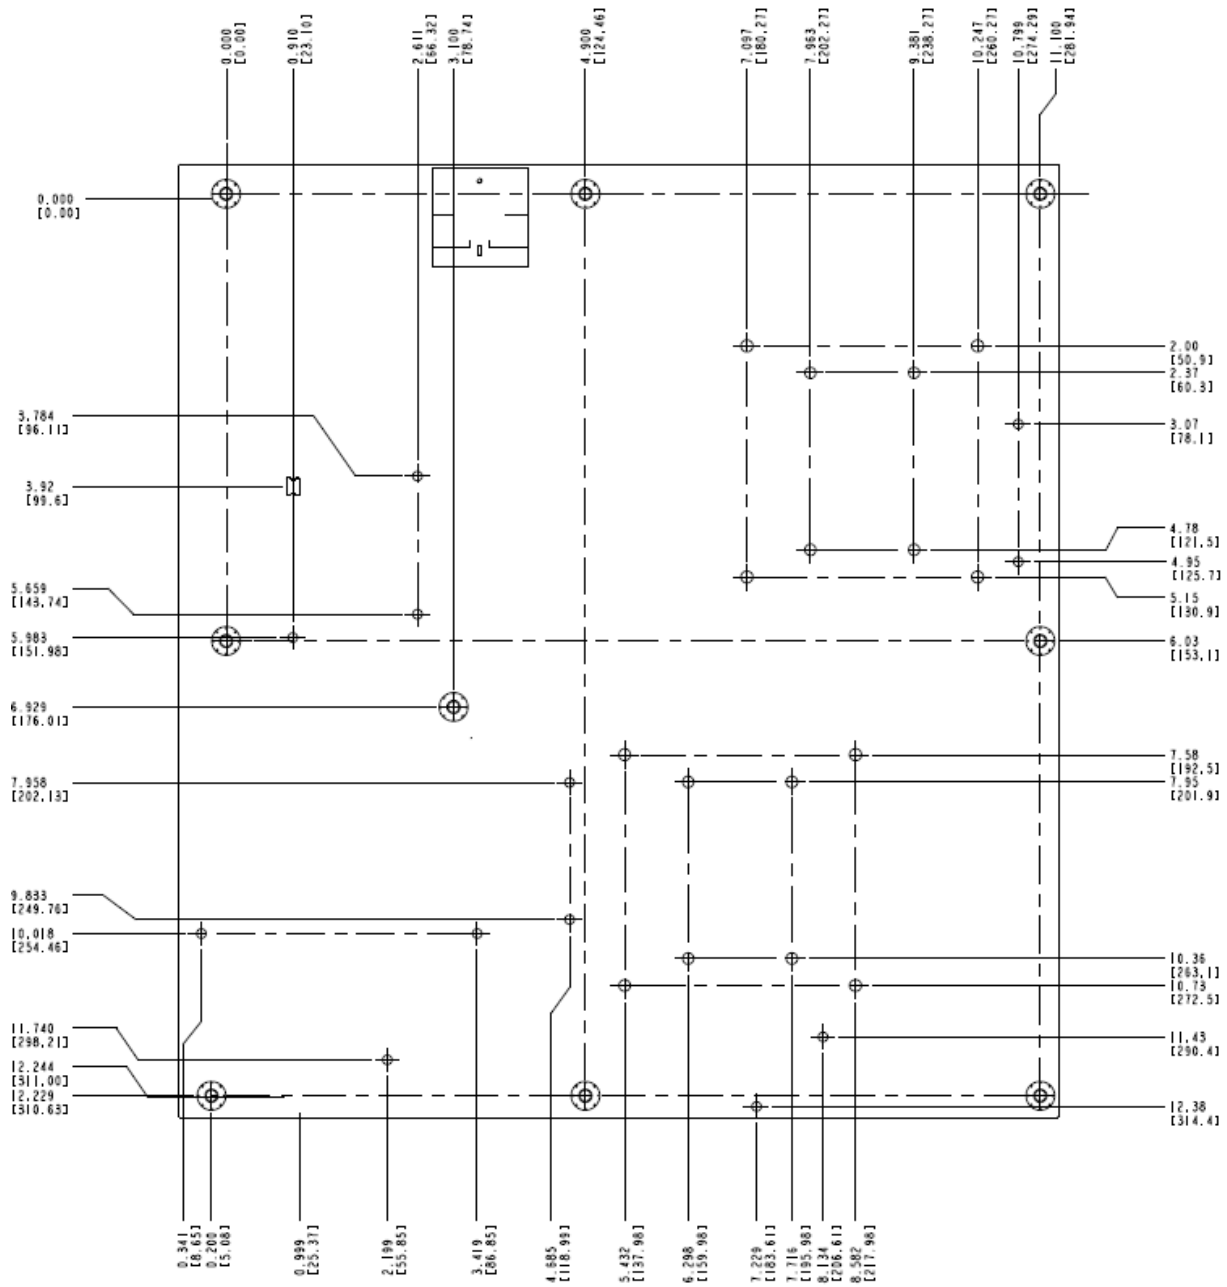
Intel® Server Board S2400GP – Mounting Hole Locations (1 of 2)
